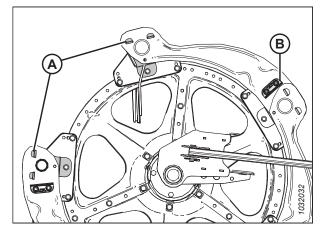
Reel Endshield Removed – Outboard Tail End
